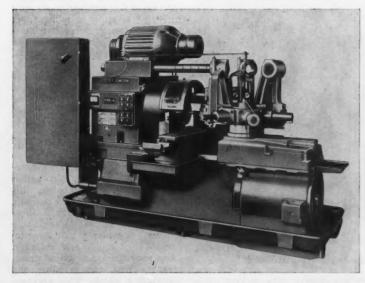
Large automatic turret lathe completely redesigned for carbide tooling
